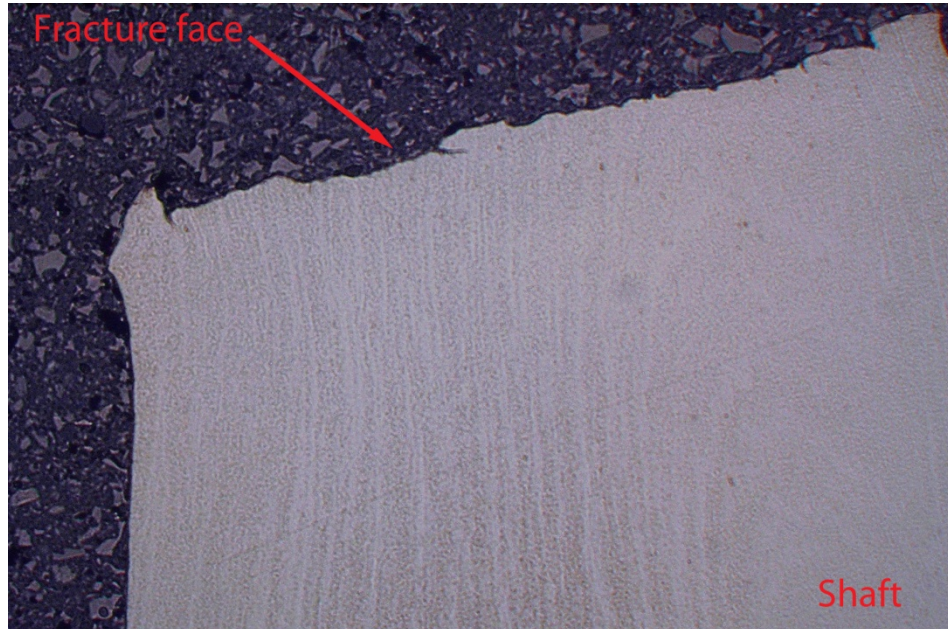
Shaft fracture face showing location of fracture with respect to piston ring groove.
